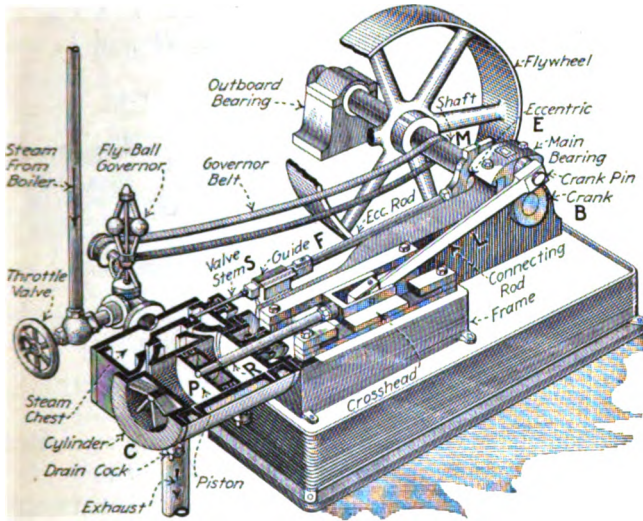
Simple D-slide valve engine with fly-ball governor.
